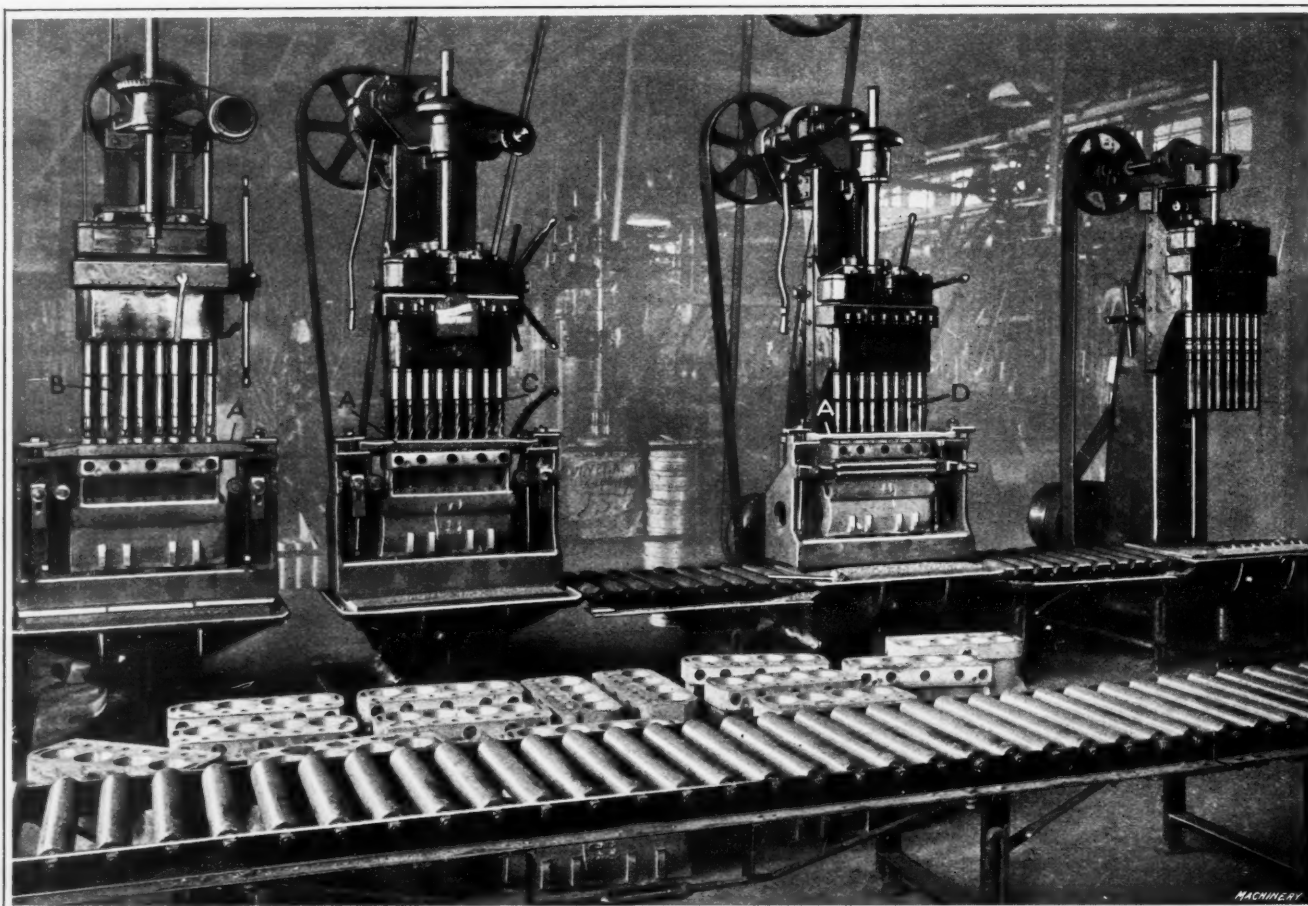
Foote-Burt Eight-spindle Drill Presses equipped with Fixtures having Interchangeable Jig Plates for boring Valve Port Holes, and drilling and reaming Holes for Valve-stem and Push-rod Guide Bushings in Cylinder Blocks—Note Conveyor System provided to facilitate handling Work
